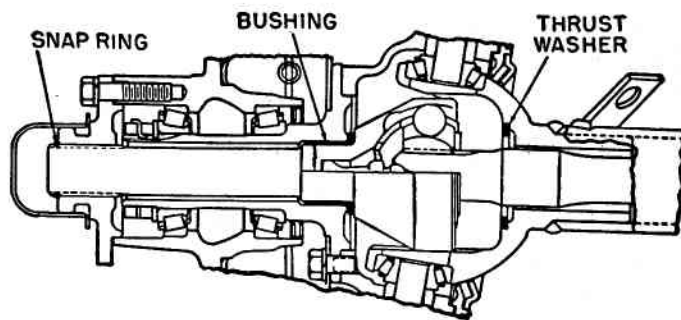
Rzeppa type axle shaft and universal joint. For "live" front axles
